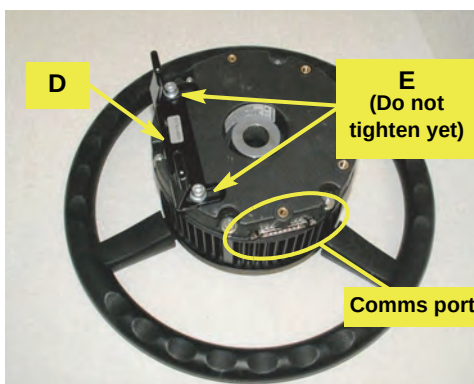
ii: 16nn models - Anti-rotation bracket installed. When the wheel assembly is installed, the a/r bracket will be to the left of the steering column, the comms port to the front.
